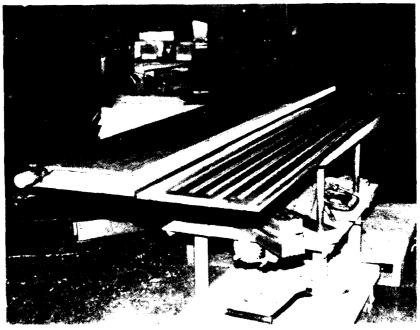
Panel Coil with Aluminum Face Plate Milled to Accept Weld Beads.
